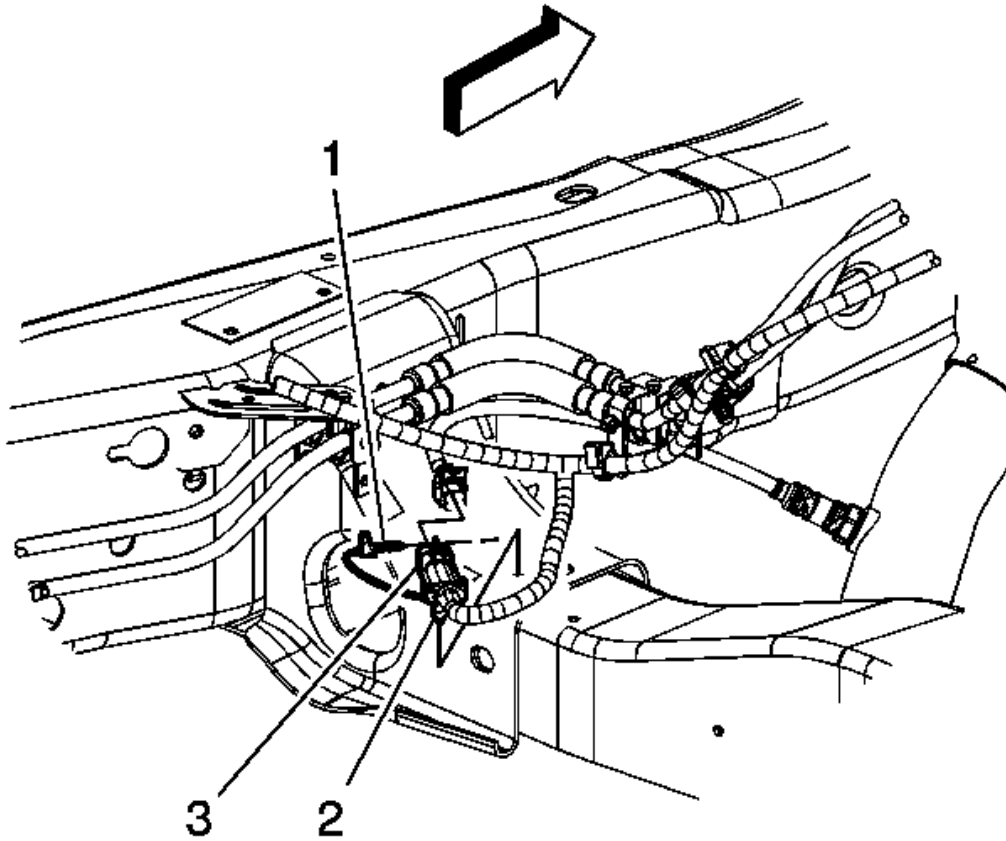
View Of Left Rear CPA Retainer & Engine Wiring Harness Electrical Connector
